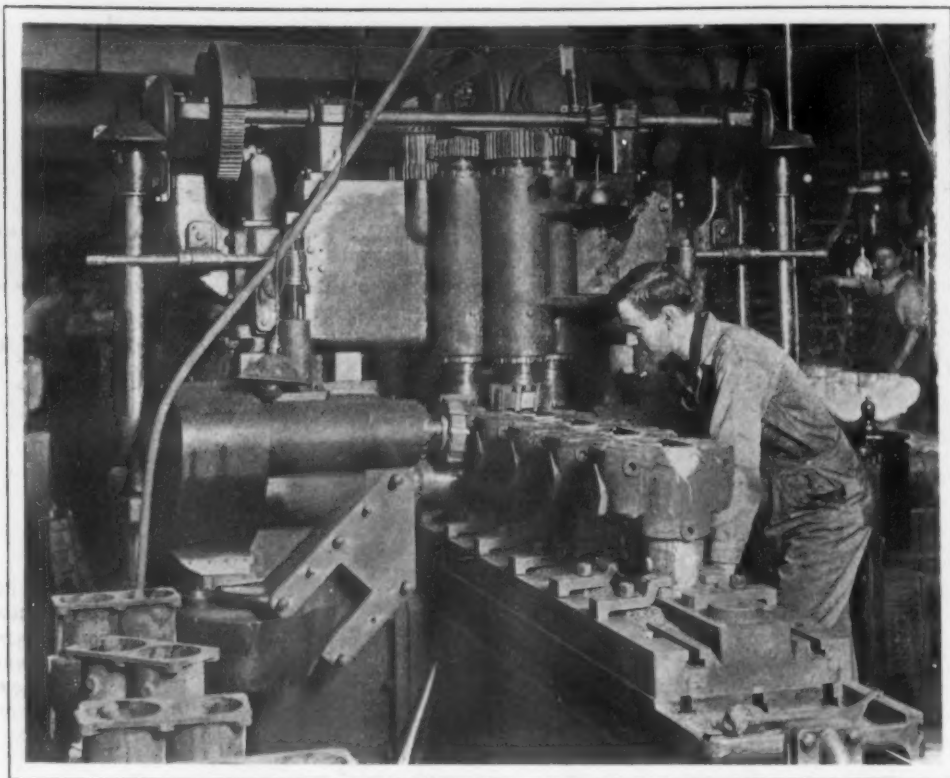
View of the Cylinder Facing Job in Which Seven Cutters Operate Simultaneously on a Seven-Spindle Milling Machine Built by Beaman & Smith
